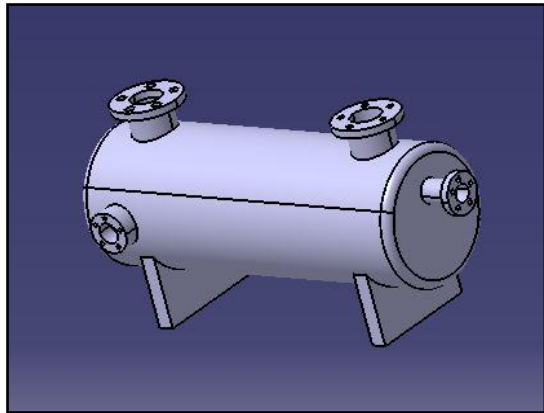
ISOMETRIC VIEW FLATE HEAD
